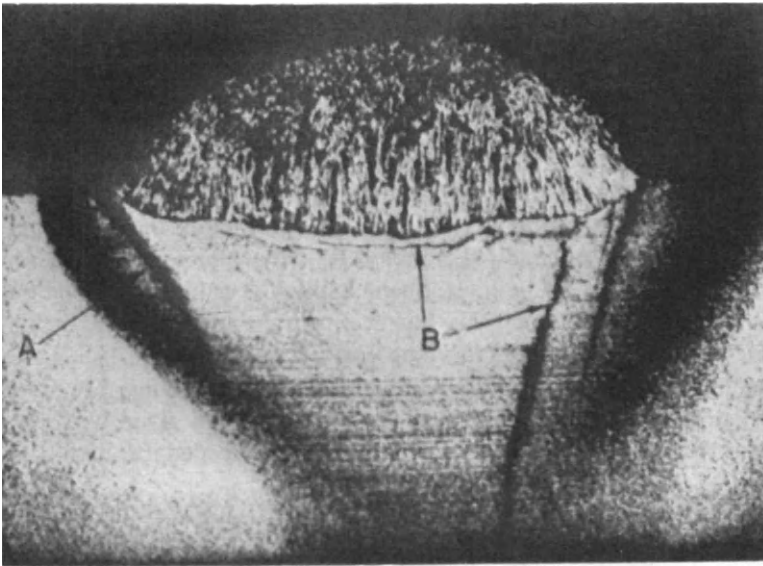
Transverse section of bead weld in $\frac{1}{8}$ -in. SAE 4130 steel sheet, showing toe cracks (A) and underbead cracks (B). 15X. Etchant: Nital. From Reference (240).
